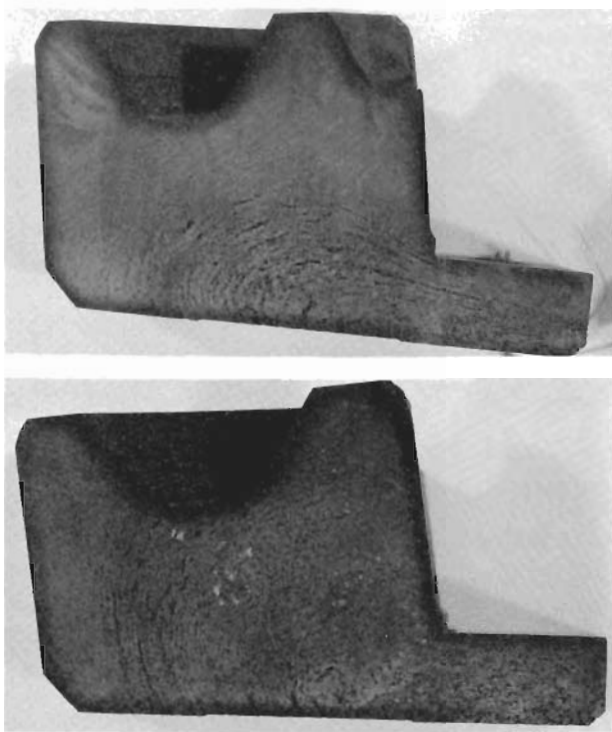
Spiral bevel gear, 2/3 \times . Macroetching of two surfaces 180 $^{\circ}$ apart from this gear reveals a major difference in material flow lines during the forging operation. The dark voids had contained several inclusions.
